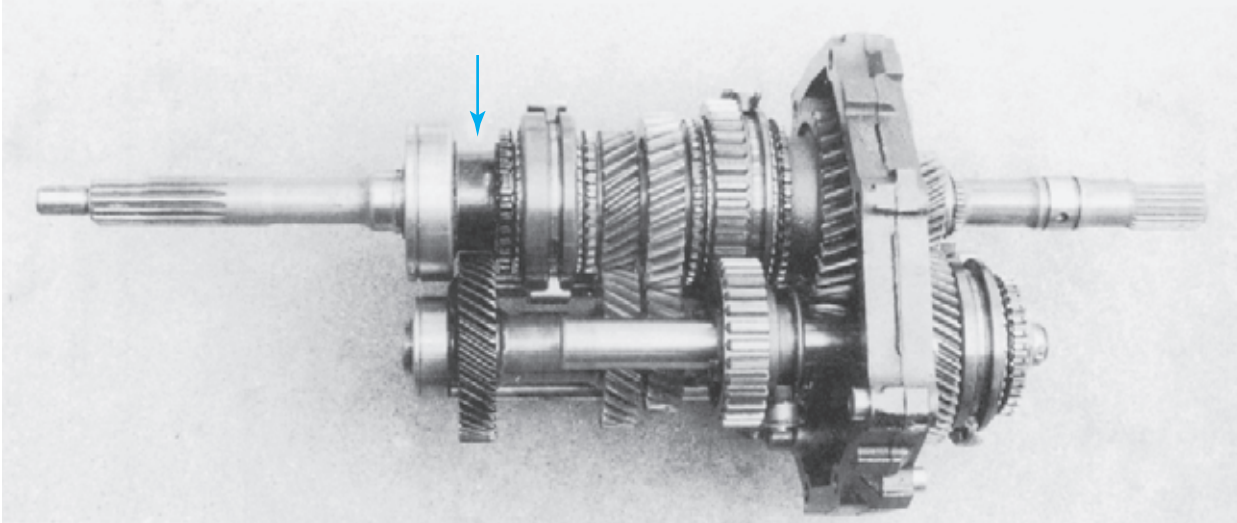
This transmission has been severely overheated; note the main drive gear and the blackened gear on the cluster that it was meshed with.
